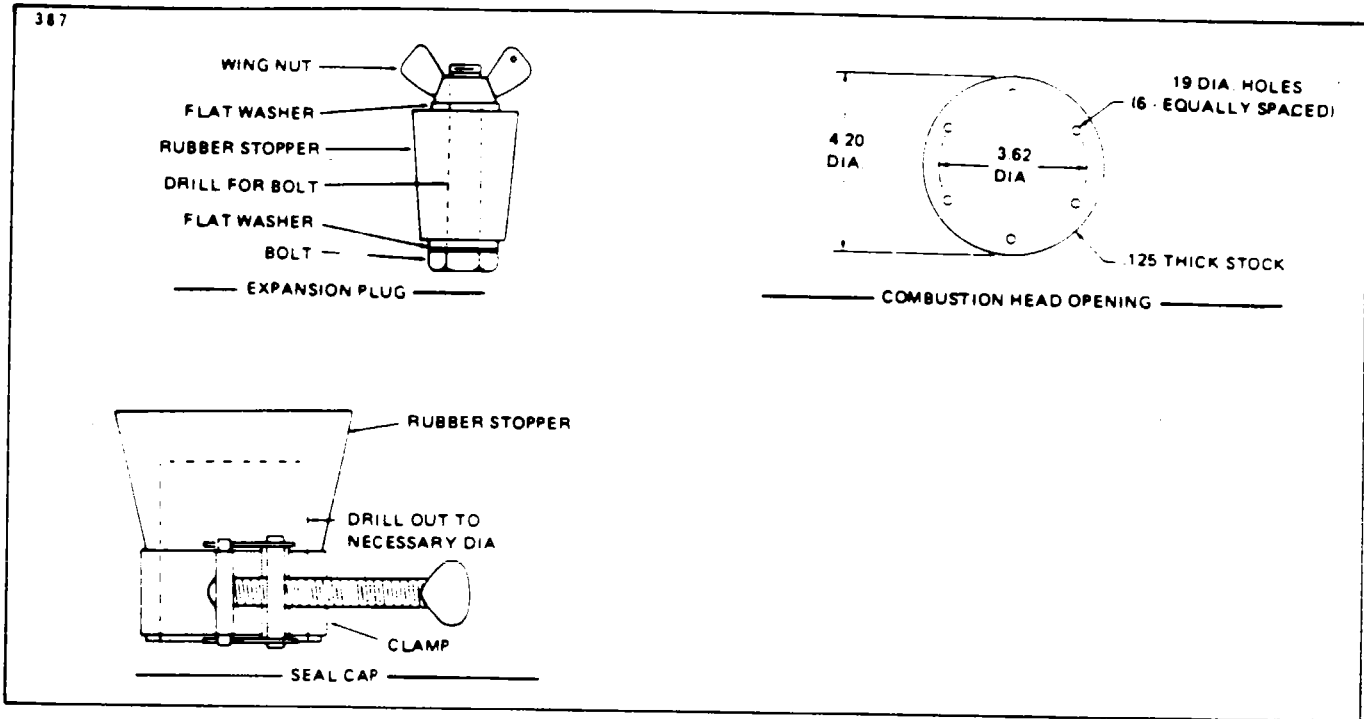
Suggested Design for Seal Plate, Plugs and Caps for Combustion Leakage Test
